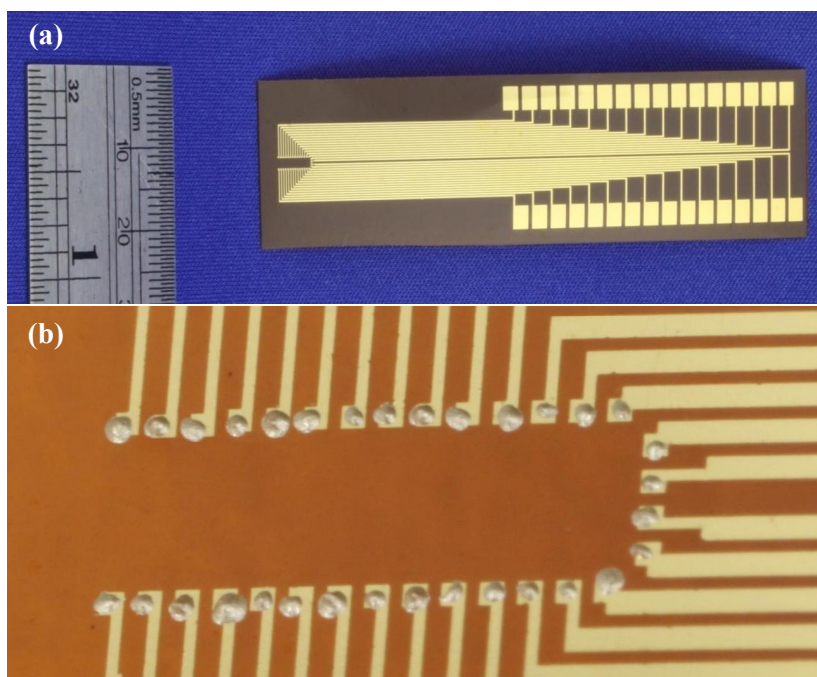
Images of (a) the flexible adaptor board and (b) the silver epoxy covered contact points.
